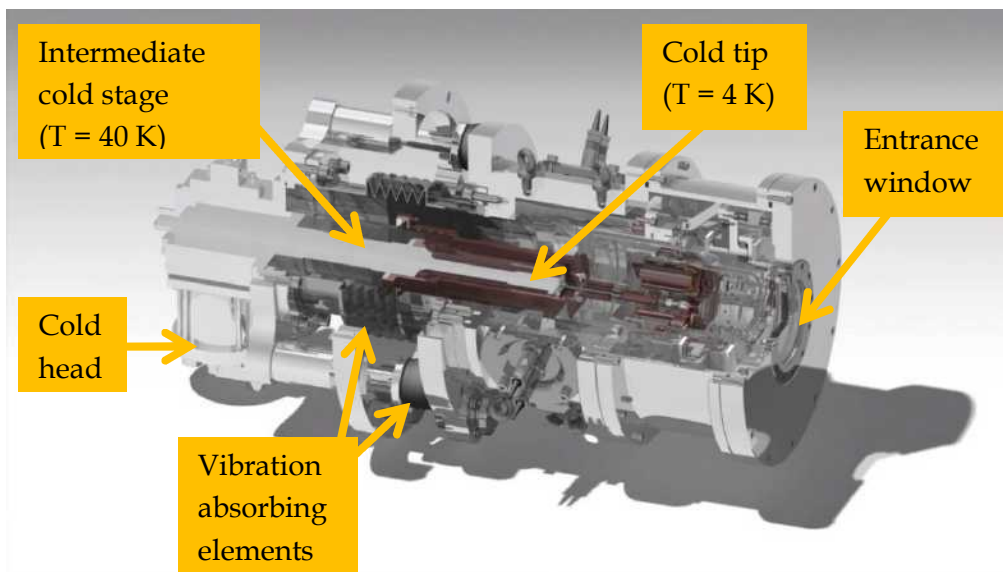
CSAR, radiometer head in vacuum chamber, cross-section; 3D model.
